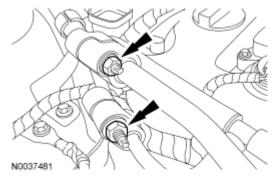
Locating A/C Tube To Condenser Nut Courtesy of FORD MOTOR CO.
